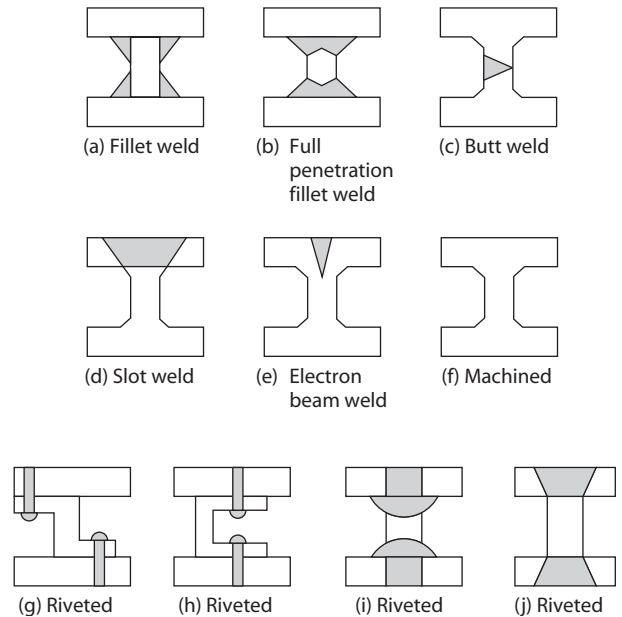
Several fabrication techniques for centrifugal impellers.
